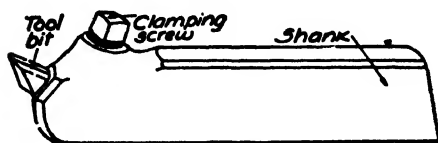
Lathe Tool with Inserted High-speed Steel Tool Bit.
